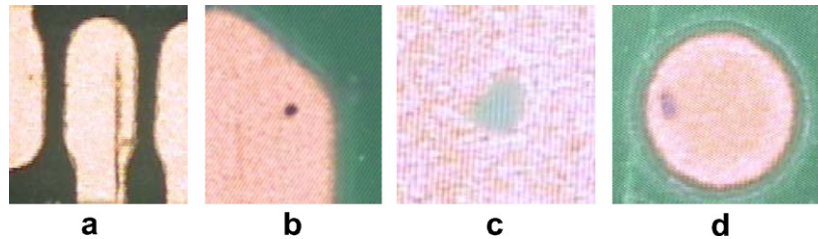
Defective BGA images: (a) scratch; (b) pinhole; (c) residual solder-mask; (d) stain.
